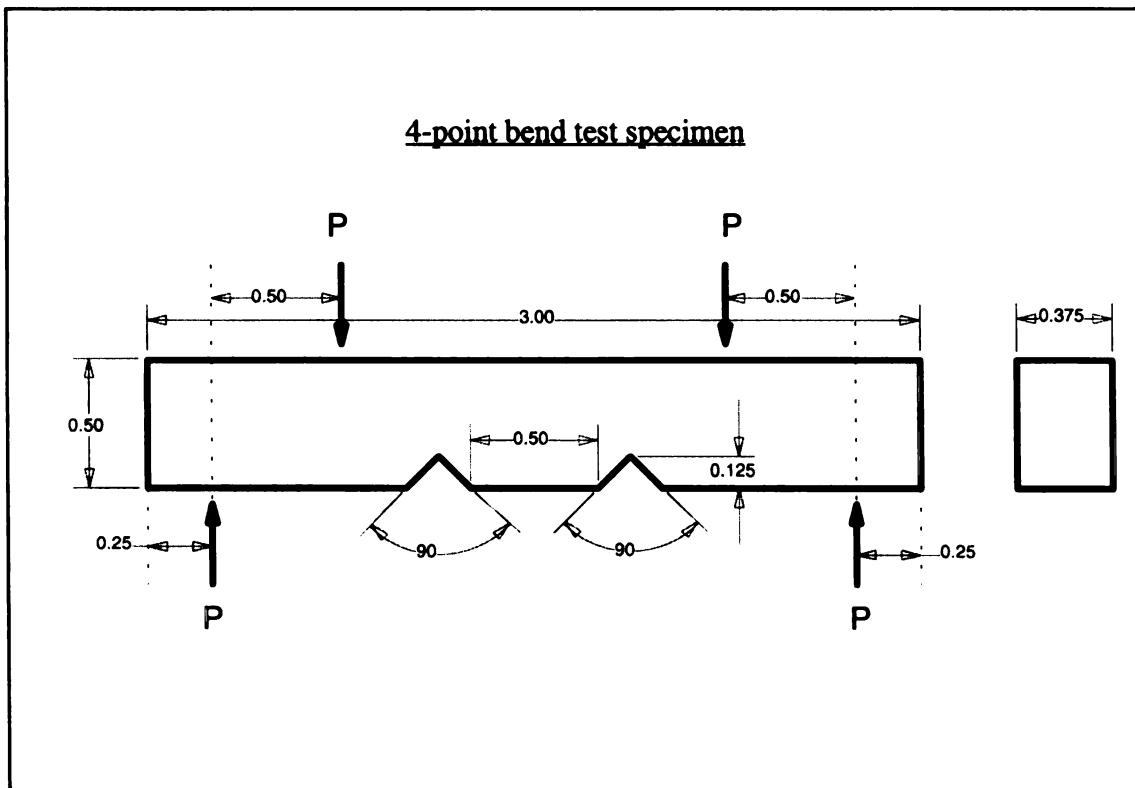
A schematic illustration for the dimension of a double notched 4-point bend test specimen. Linear dimensions given are in inches.
